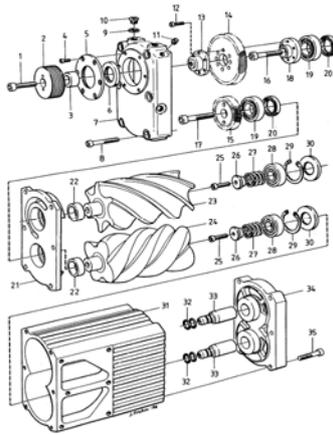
An engineering design exploded view drawing. (Pipes 2007)
